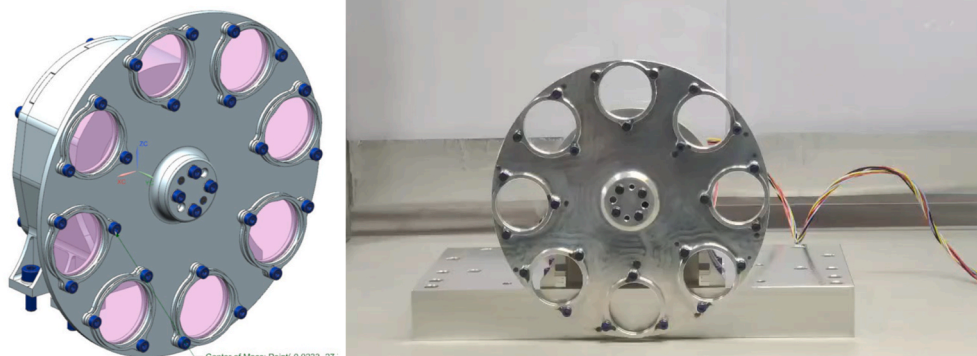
Design drawing (left) and prototype (right) of the VenSpec-H filter wheel mechanism.
